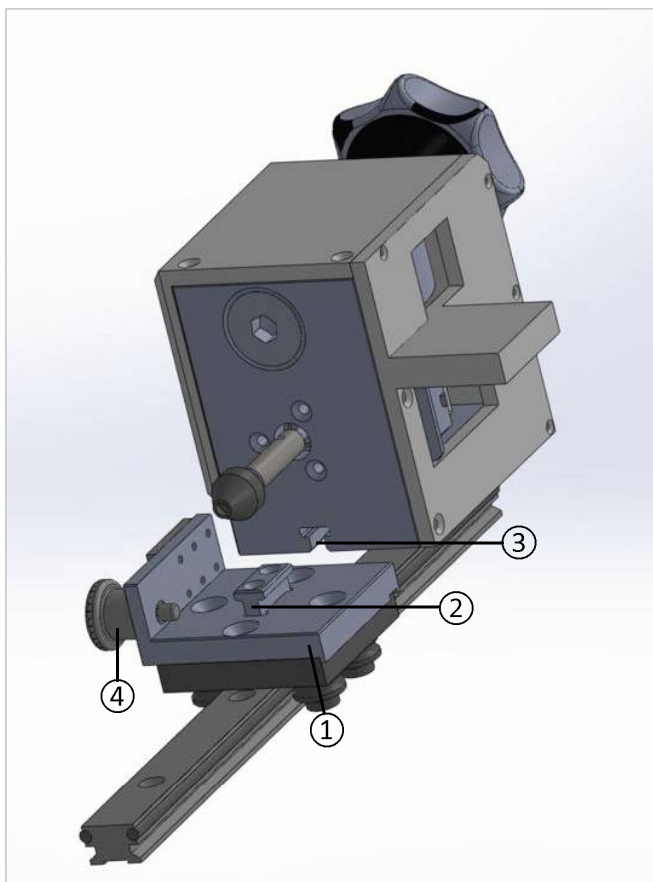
T-coupling between the surgical tool and the adapter mounted on the carriage: 1) Adapter; 2) T-slot nut; 3) T-slot track; 4) Piston.
